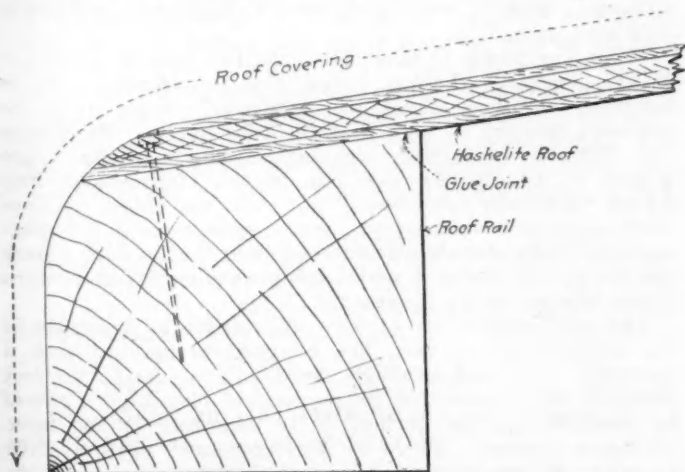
CROSS-SECTION OF TAXICAB ROOF SHOWING METHOD OF ATTACHING PANEL TO RAIL
